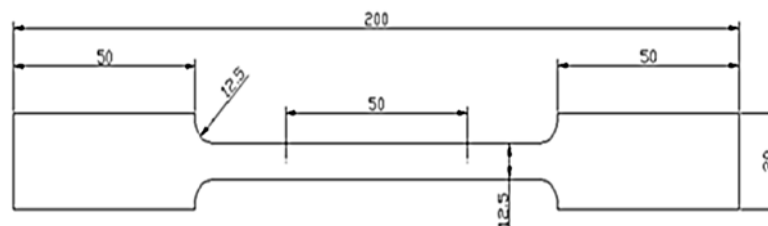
Rectangular cross-section tensile test specimen according to ASTM E8-M. [1°] All dimensions are in millimeters.
